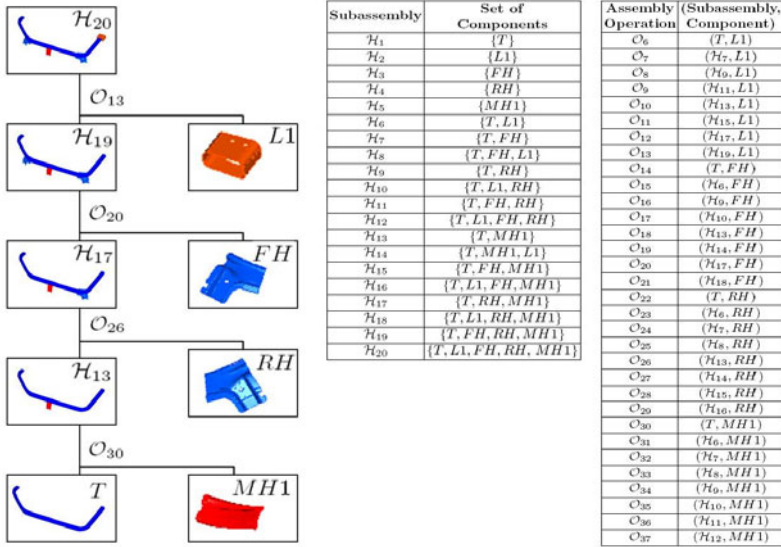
Example assembly sequence for product “A” and a list of possible assembly operations
